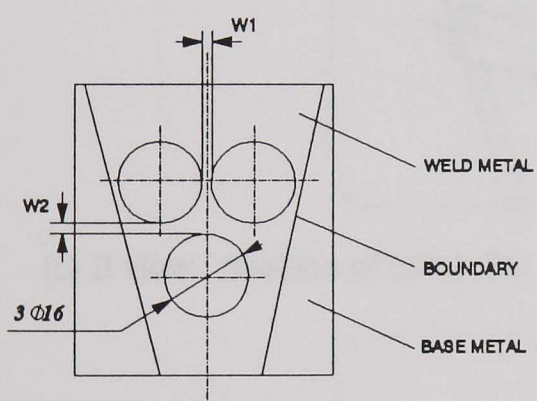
Dimensions of uniaxial test specimens (mm).
